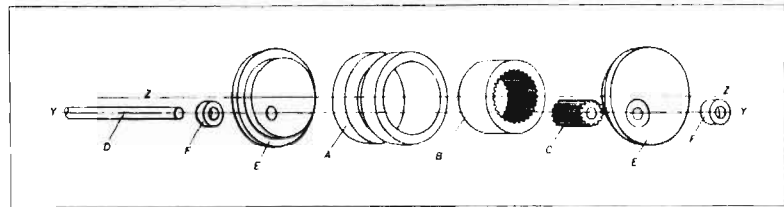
Exploded view of shaft-mounted speed reducer. For quantity production, internal gear *B* can be eliminated and the teeth cut directly in sleeve *A*.
